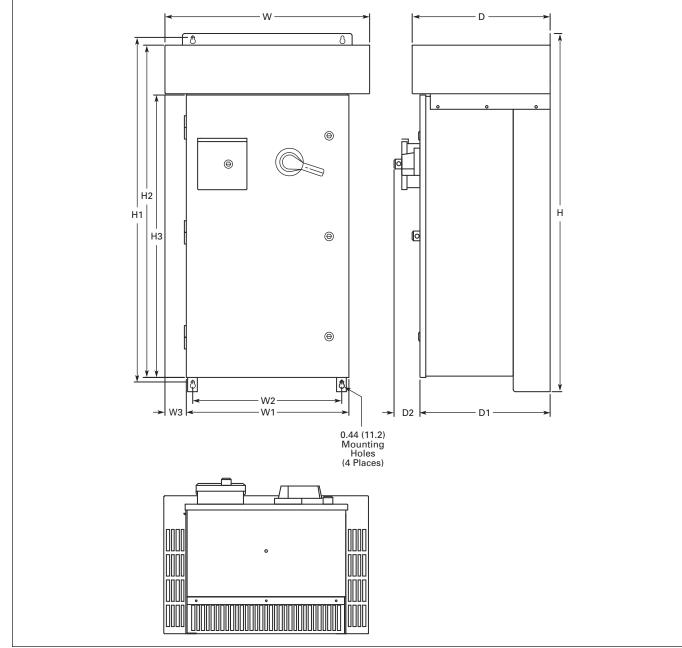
Enclosure Box B — UL Type 3R Dimensions
